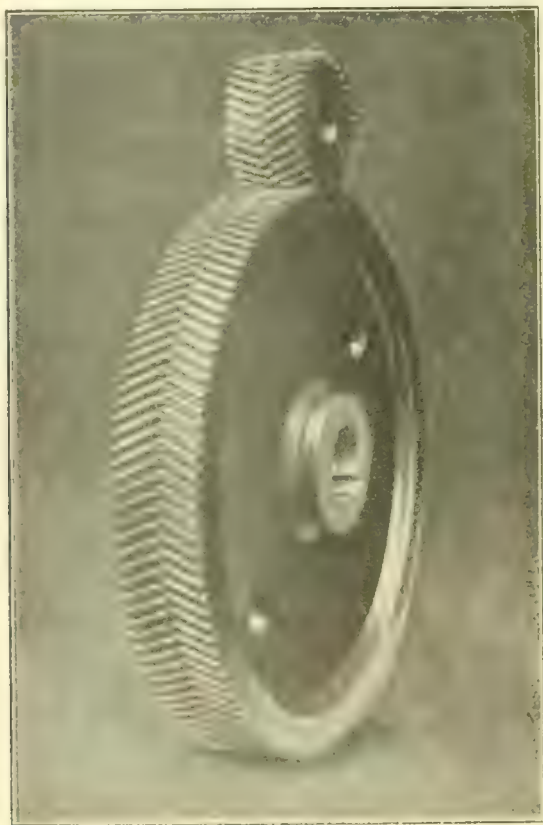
TYPICAL HERRINGBONE GEAR AND PINION.
